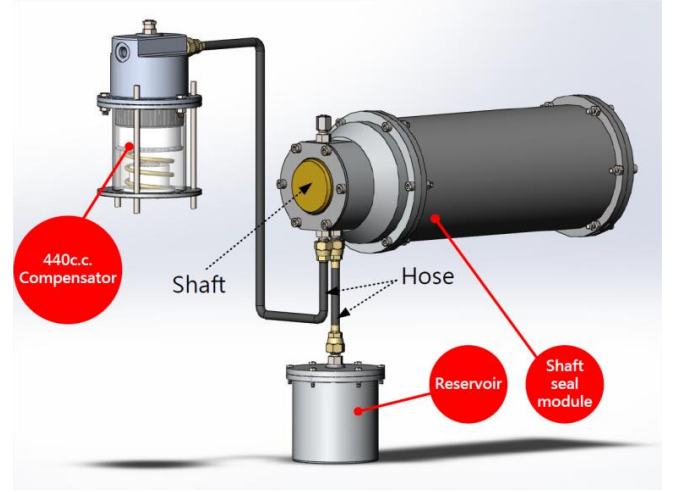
Passive oil compensated shaft seal module (1/25 scaled). Consisted of 440 c.c. passive oil compensator, shaft seal module and reservoir. The characteristics of high reliability, maintenance free and adapted to different water column would help enlarge FKT working endurance.
